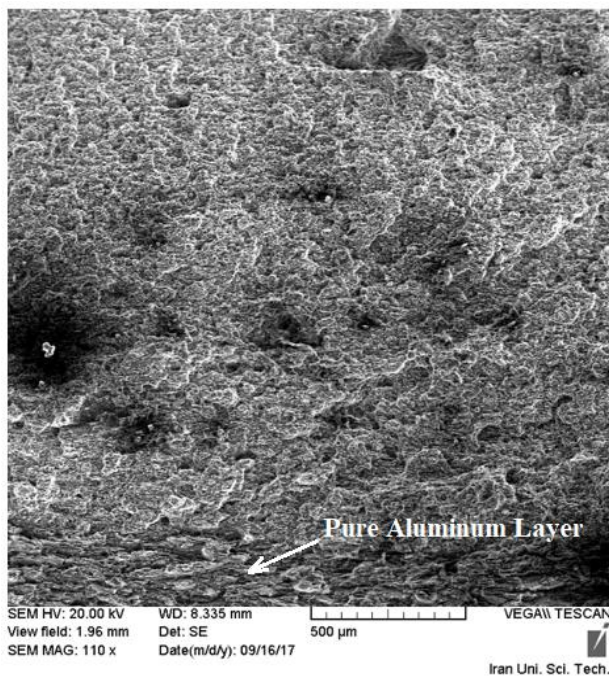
Fracture surface of the 5-layer FGM sample in flexural test (pure Al layer is at the bottom)
